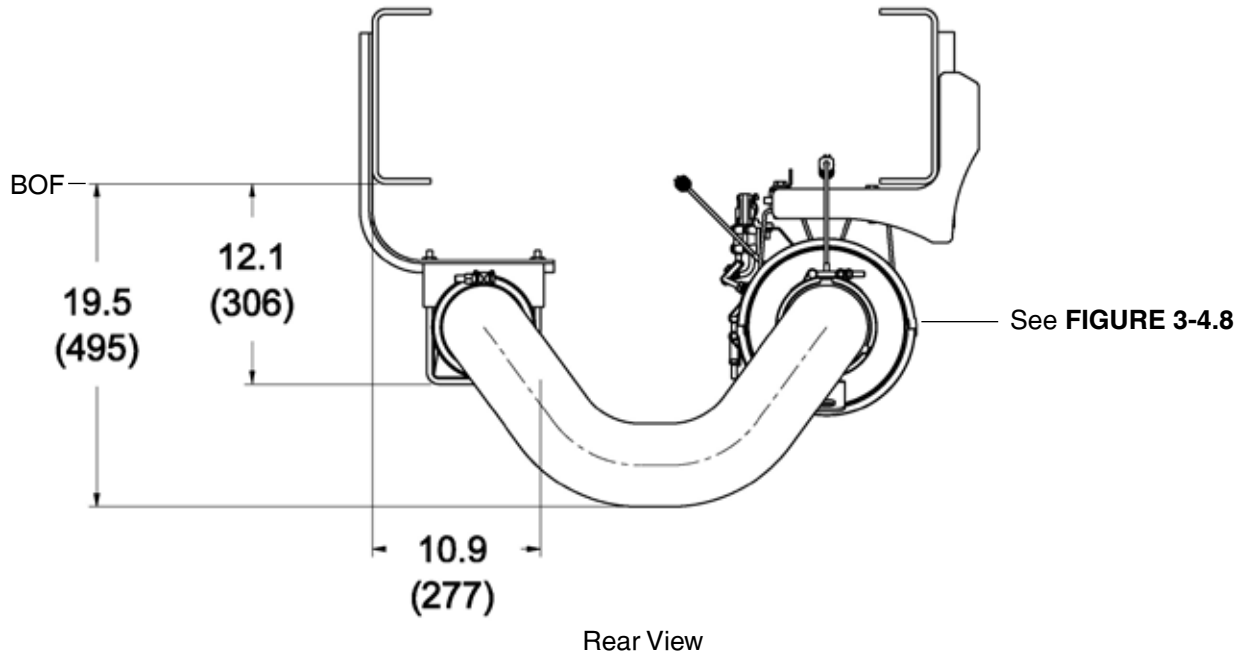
Horizontal Exhaust with LH Side Existing Tailpipe Measurements [inches (mm)]
